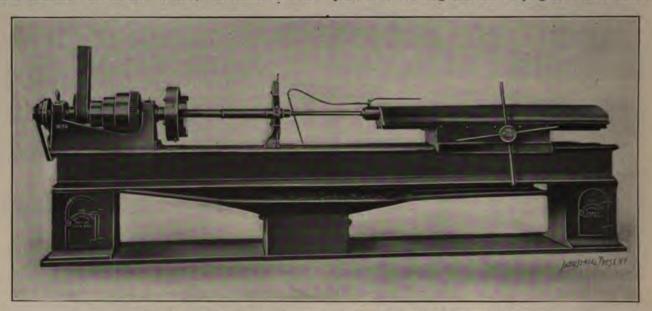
Drilling Lathe Manufactured by the Lodge & Shipley Machine Tool Co.
